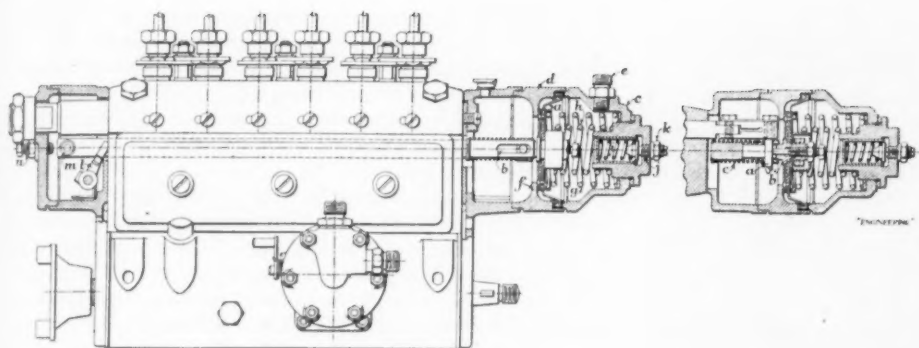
SECTIONAL DRAWINGS OF CONTROLLER
